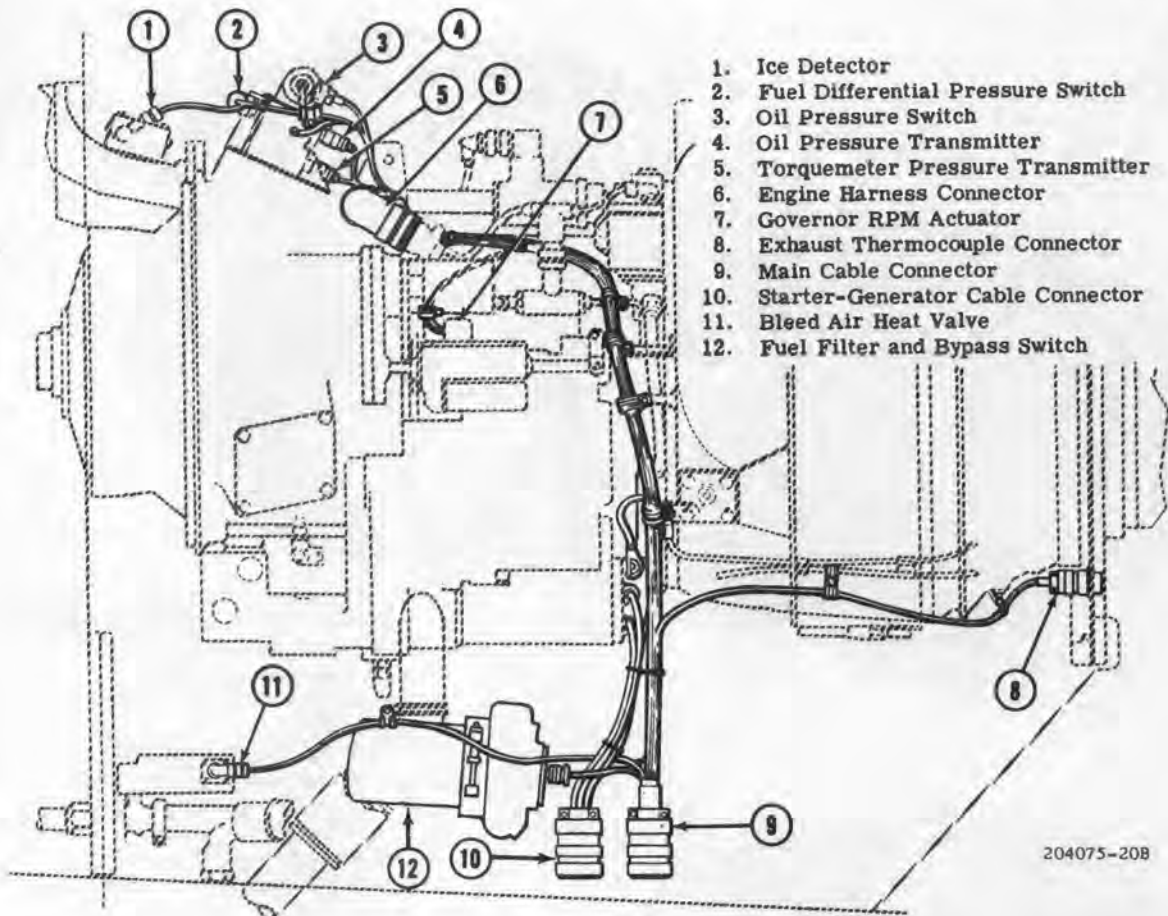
Power plant electrical cables — UH-1B (typical)
